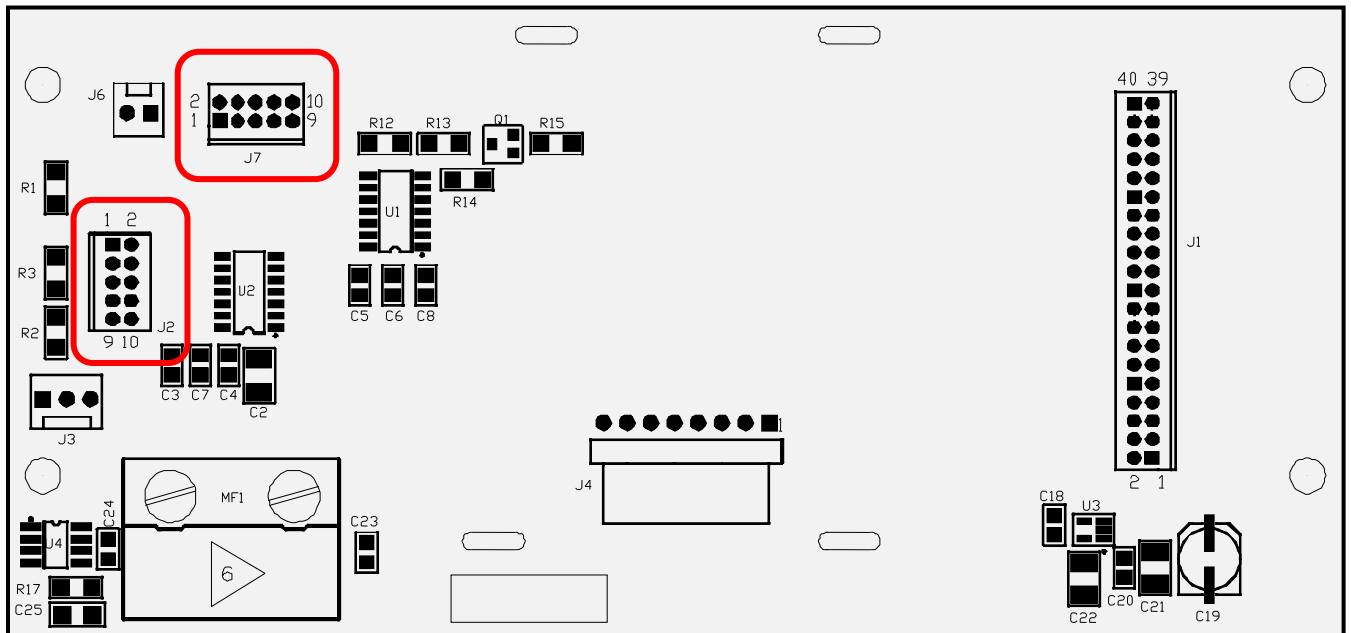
Front Panel Printed Circuit Board Containing Probe Connectors J2 and J7
